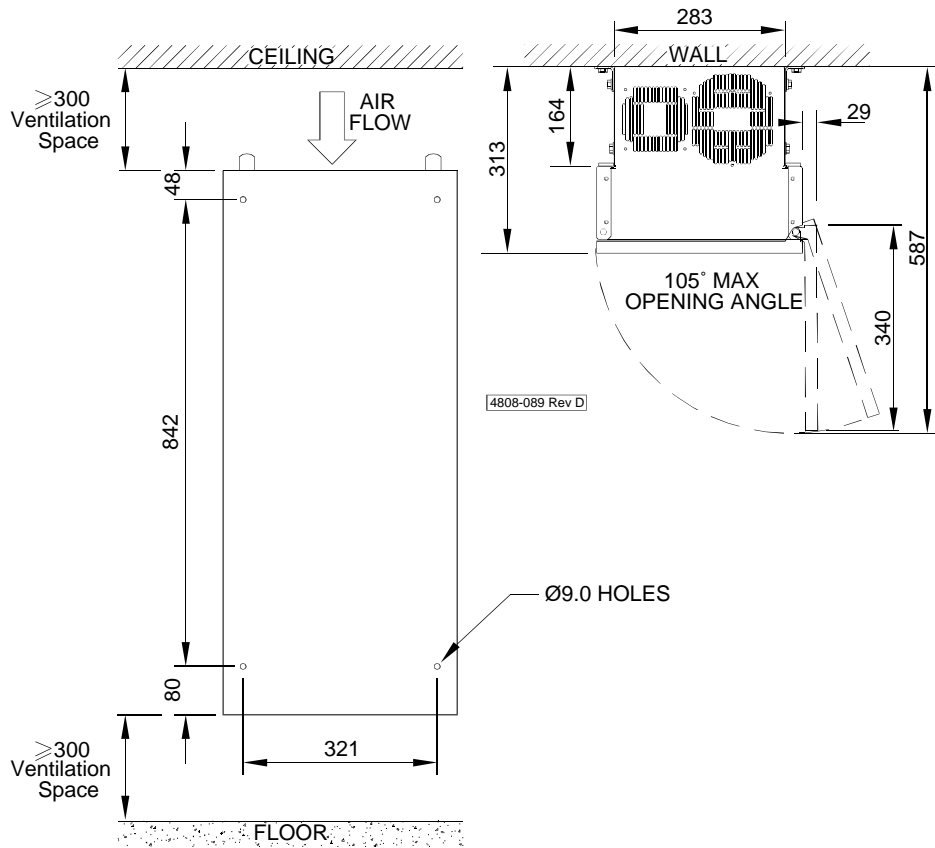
Ultradrive E-Series Frame 4 Mounting Details
